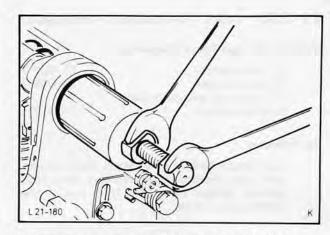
Remove oil seal, using Special Tool 21-008-A
